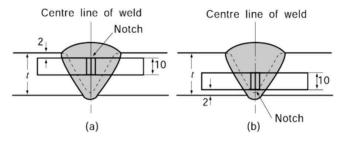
Position of Impact Test Specimen for Butt Weld with One-run and Multi-run Technique (Unit: mm, t = Plate thickness)
